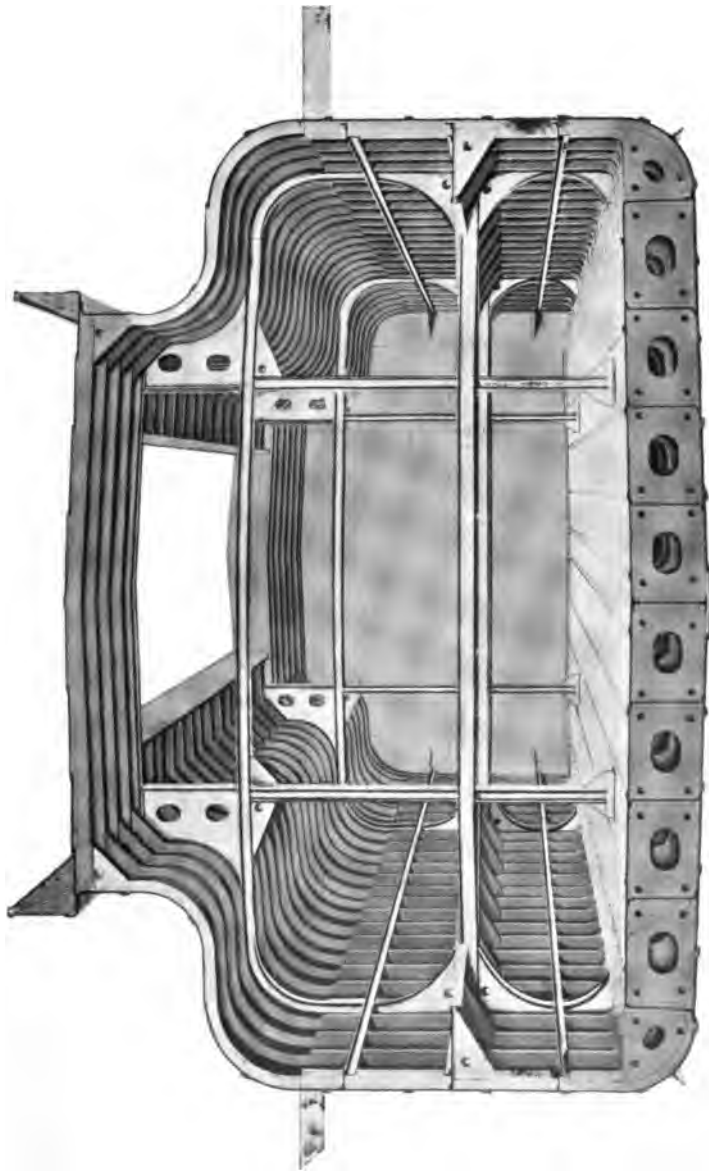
Hold View of Turret Steamer. Ordinary method of construction with beams. Dimensions, 350 ft. 0 in. B.P. x 50 ft. 0 in. moulded x 25 ft. 3 in. depth moulded (harbour deck).
